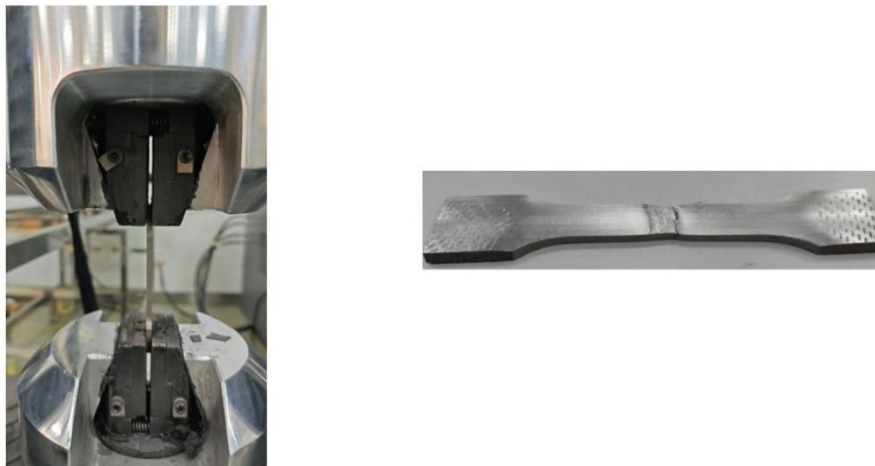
The pictures of tensile test and the specimens after the tensile test.
